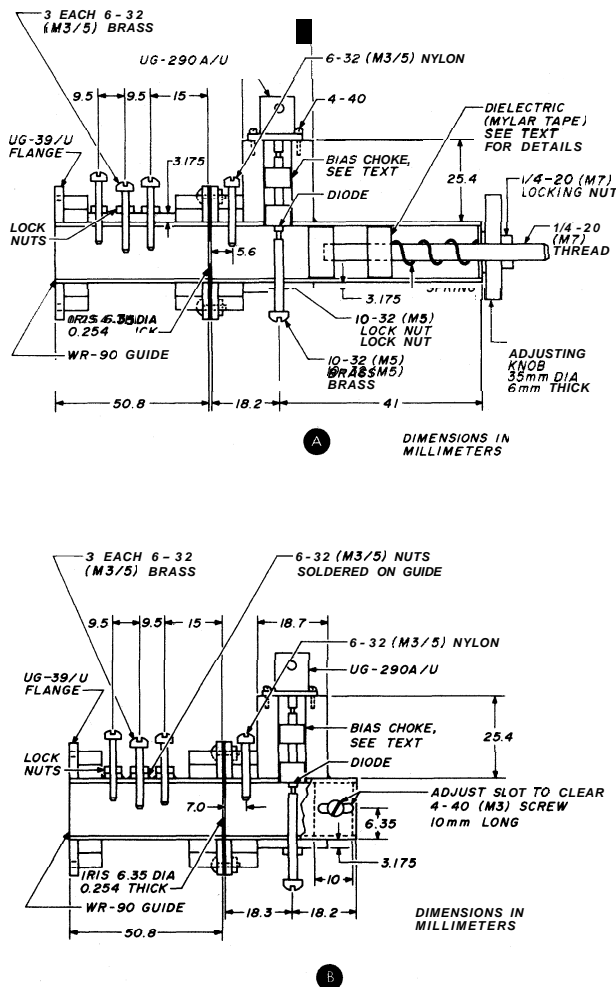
Assembly drawings of two Gunn oscillators. A design using an adjustable choke plunger backshort is shown in A. The oscillator in B has an adjustable contacting backshort that can be locked into place.
